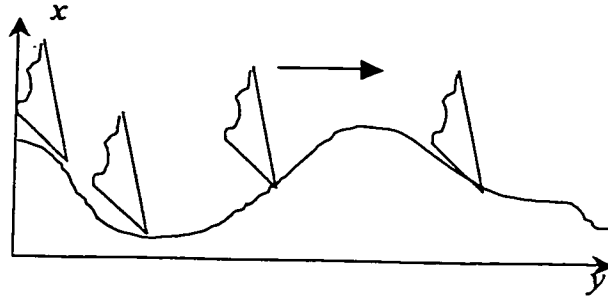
Machine Tool Cutting on the Wavy Surface
